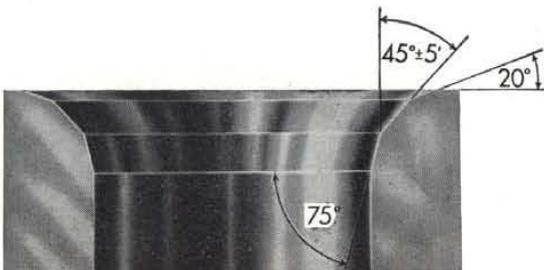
View of a valve seat which has been reseated with 20° and 75° cutters.
